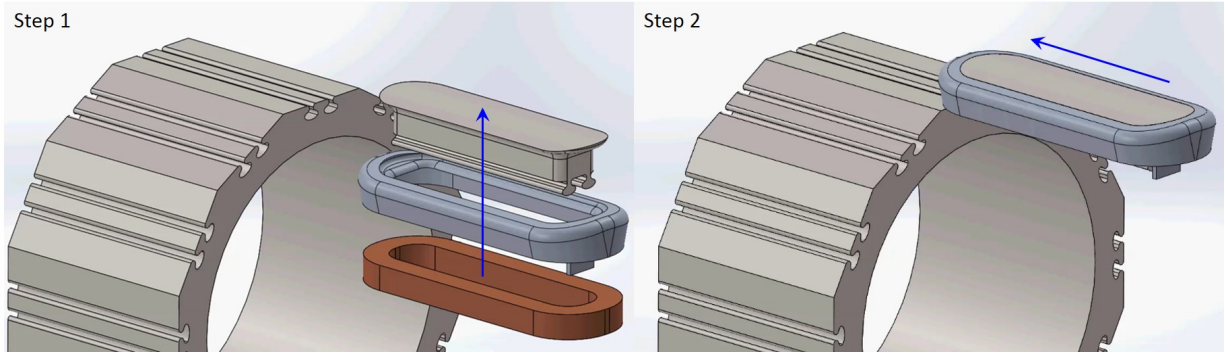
Assembly procedure for one rotor tooth sub-assembly.
